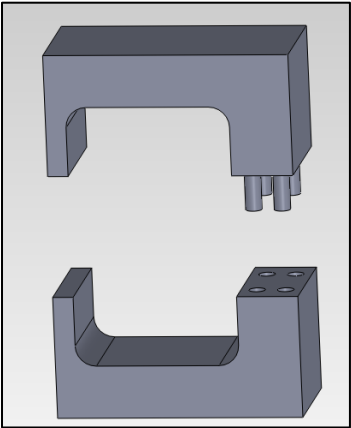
"LEGO®" Based Clamp Exploded Assembly
